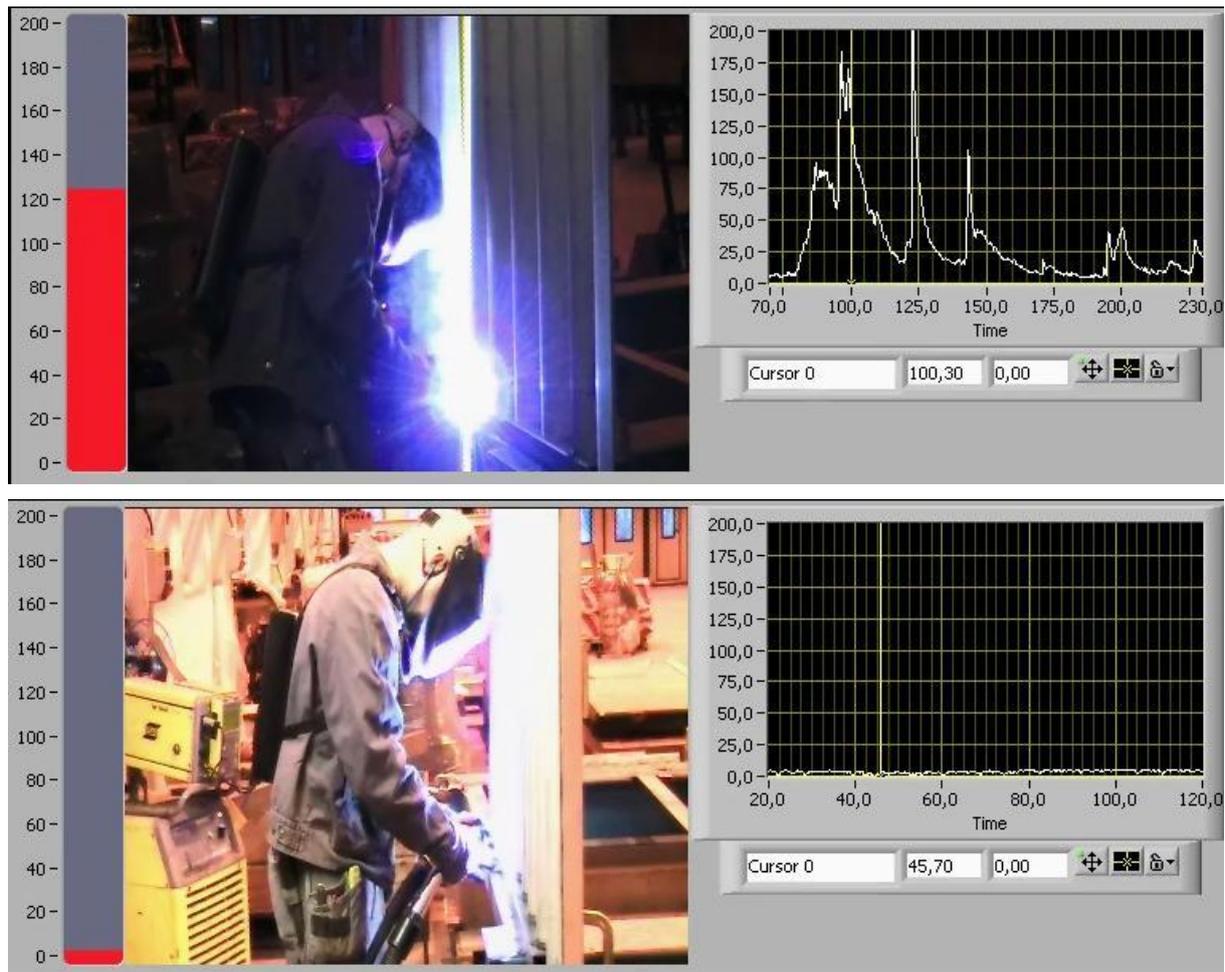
Screen dumps from PIMEX recordings comparing exposure to welding smoke (relative values) during welding in stainless steel. First picture without exhaust on welding pistol. Second with.
